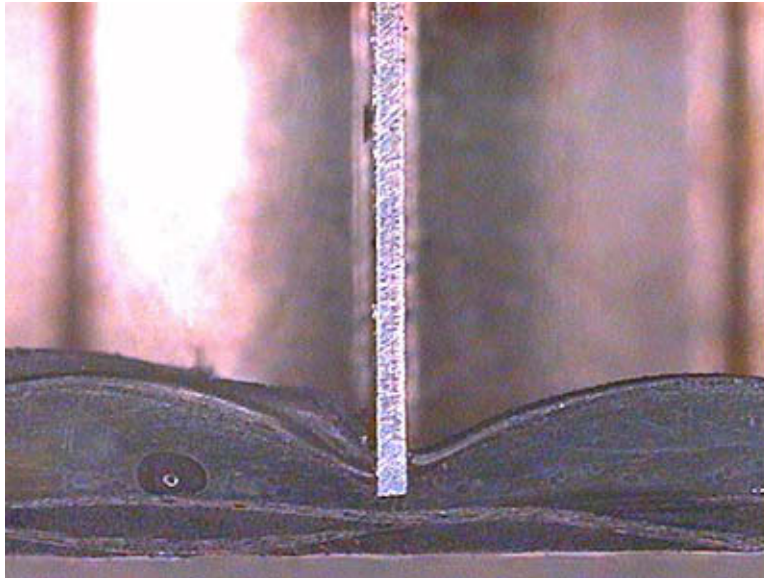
(c) *A well formed fillet.
